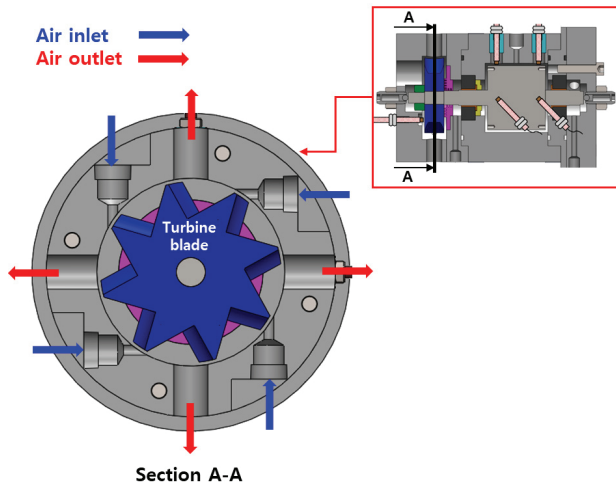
Detailed cross section view of impulse turbine part for driving rotor
